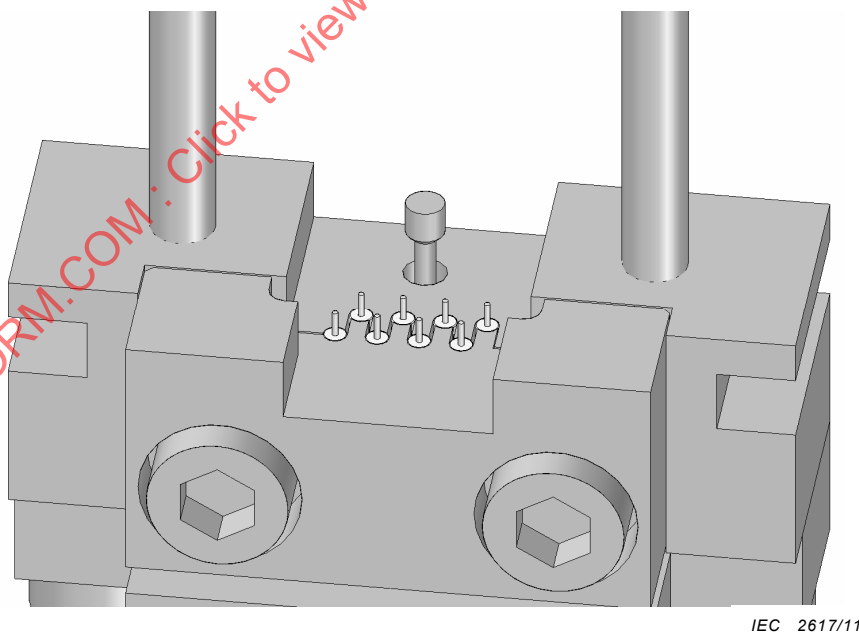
Free connector direct fixture, DPMF-2 view 2
